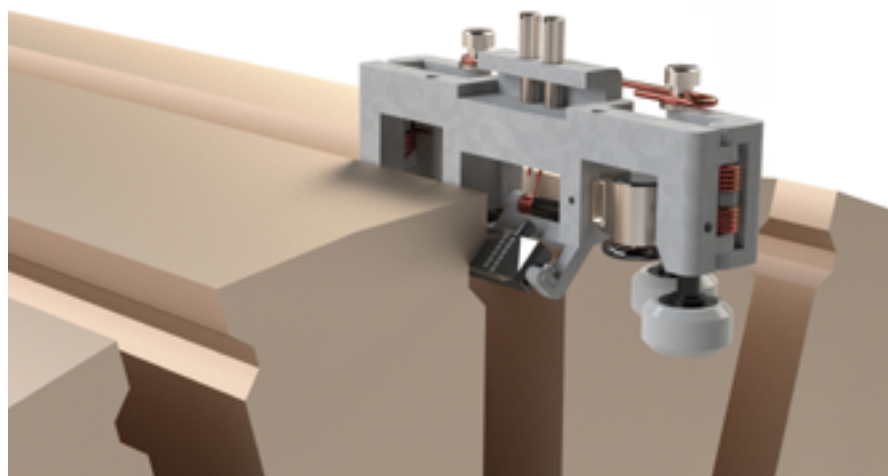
Scanning fixture and probe for eddy current inspection of dovetail crush surface with wedges removed
